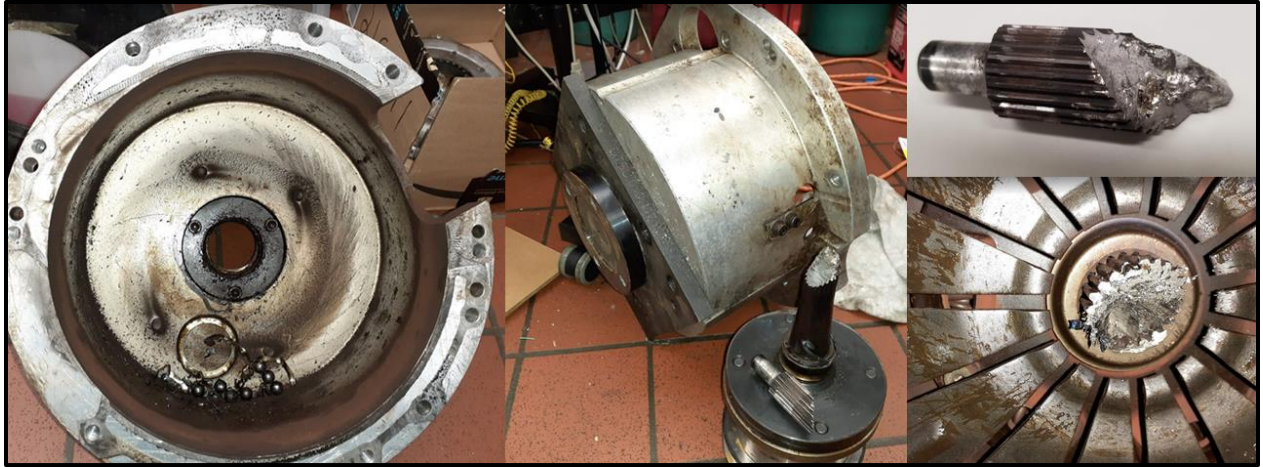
Clutch Plate and Dyno Shaft Failure at UM Auto Lab.
